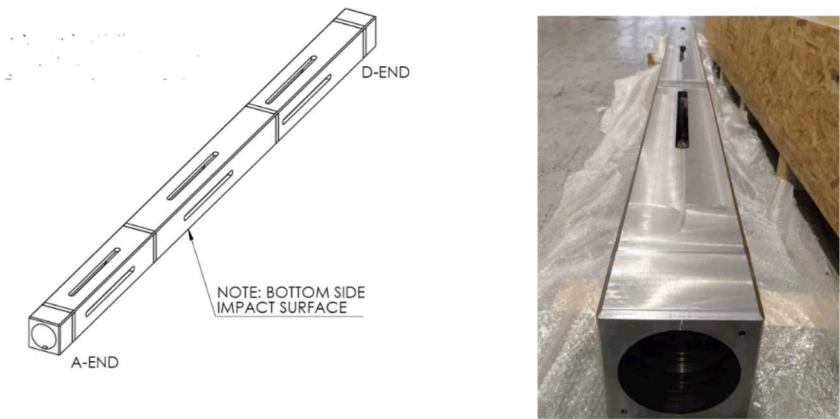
Drawing (left) and actual (right) full-scale dummy assembly.
